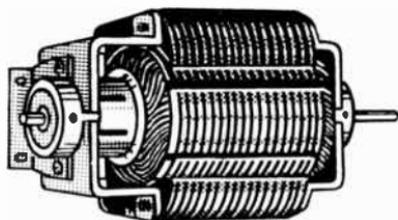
A universal motor, showing the laminations in the field pole pieces.
